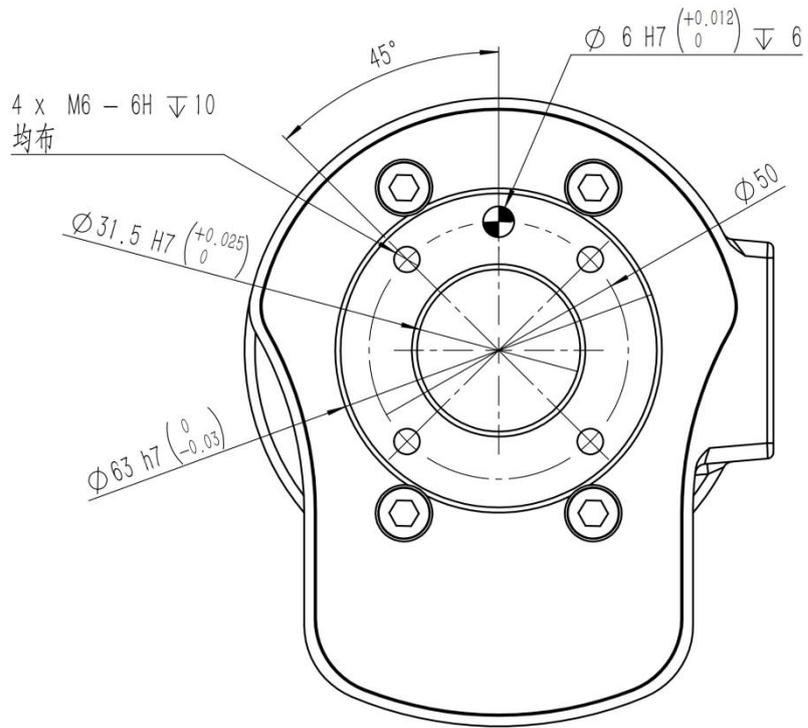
Mechanical mounting port for the - S10-140 flange
